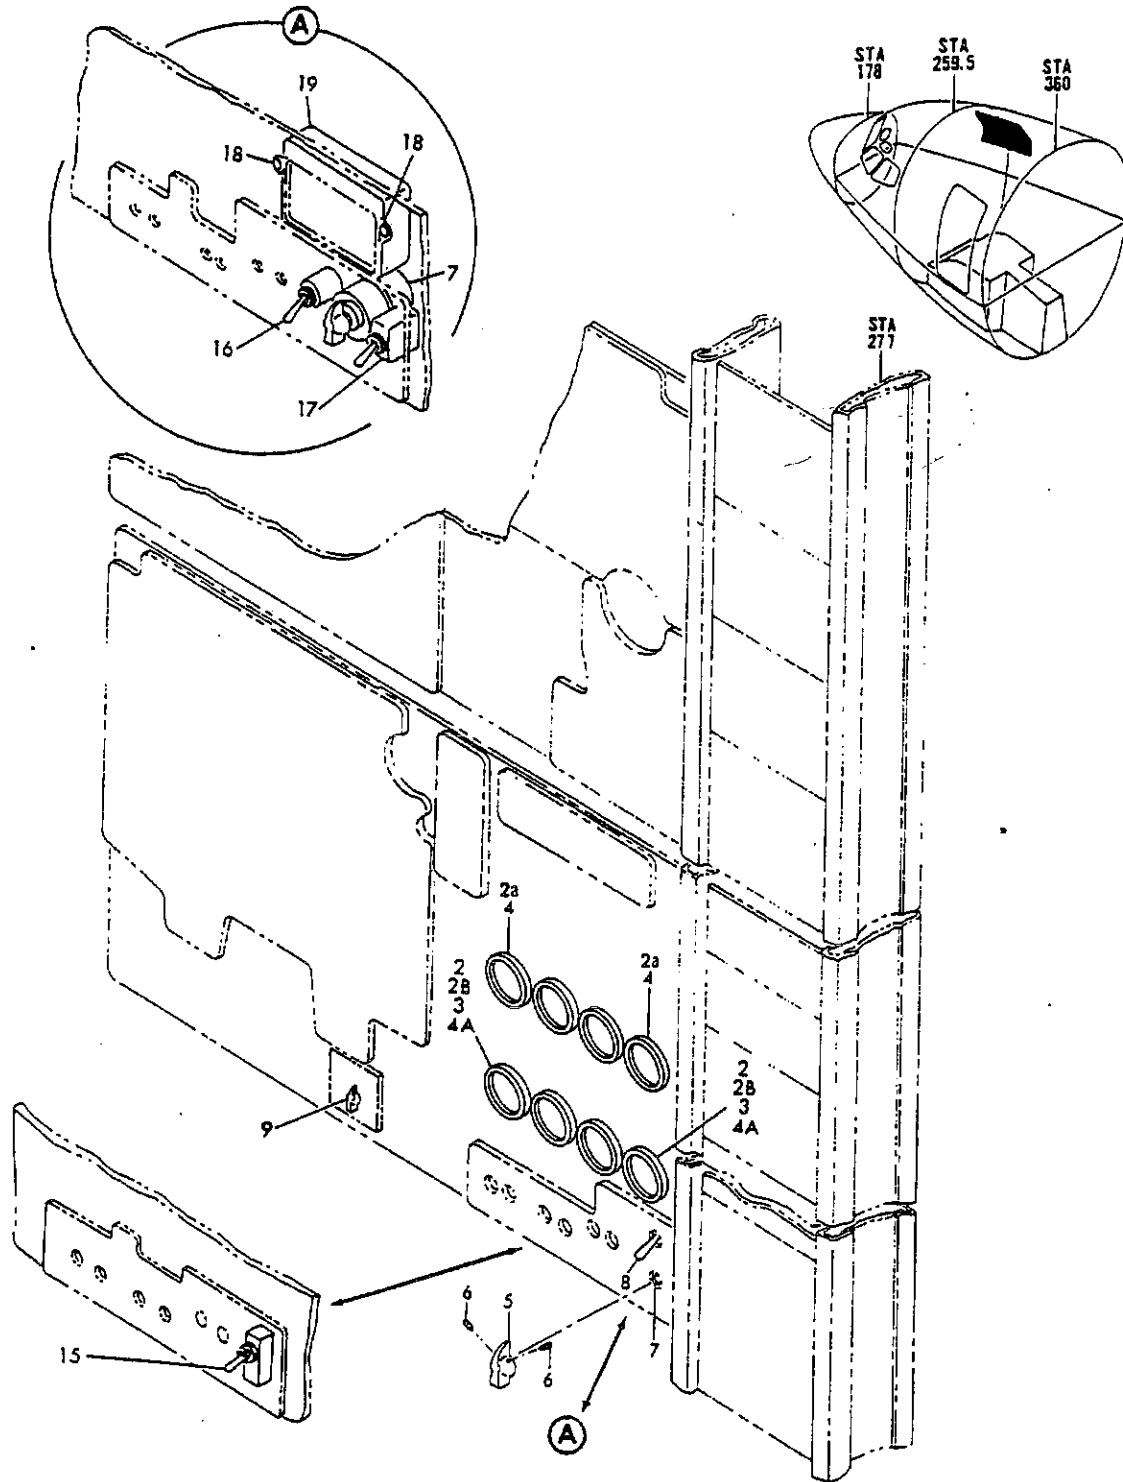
P. PANEL INSTL, FLIGHT ENGINEERS LOWER (ENGINE INDICATING ONLY)
